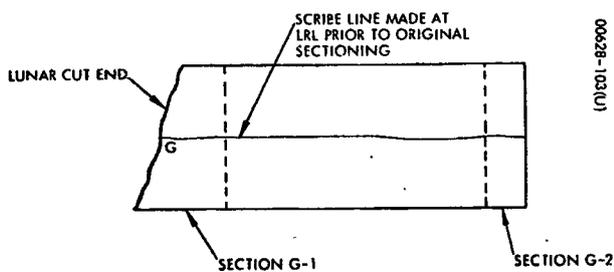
Section G of Polished Aluminum Tube Shown in Figure A-1, Indicating Further Subsections Removed at Hughes
